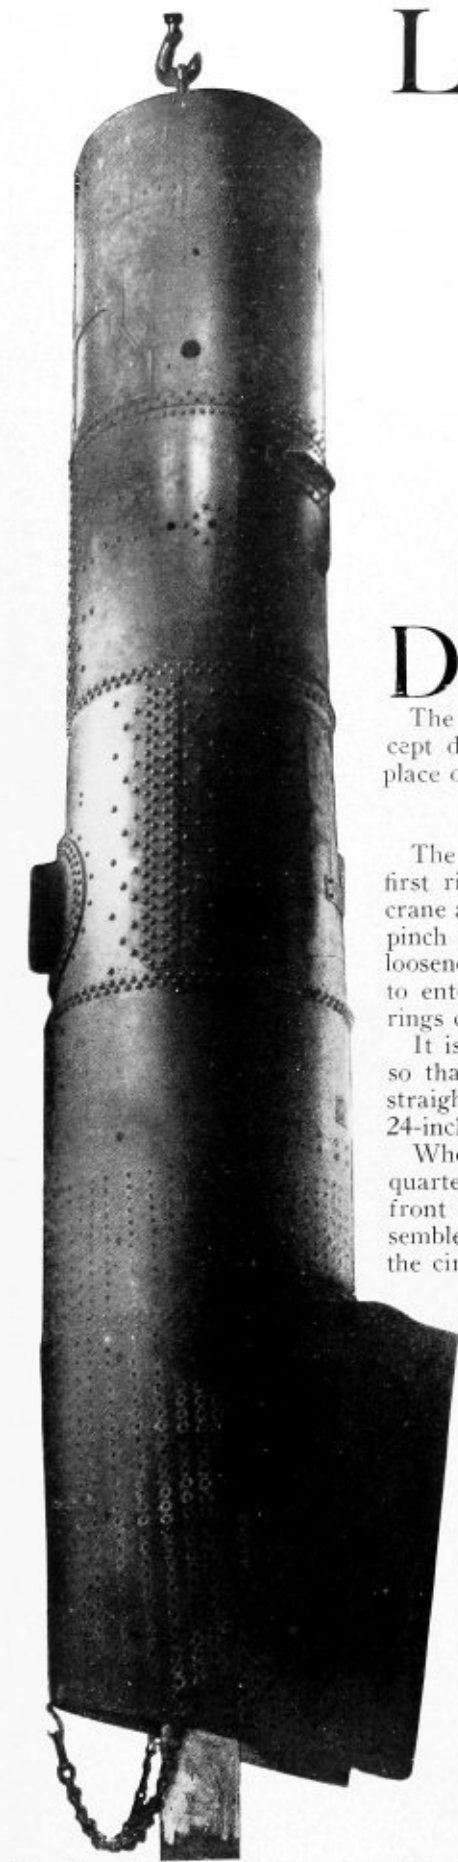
Boiler over riveter just after the casing and throat sheet seams have been riveted
